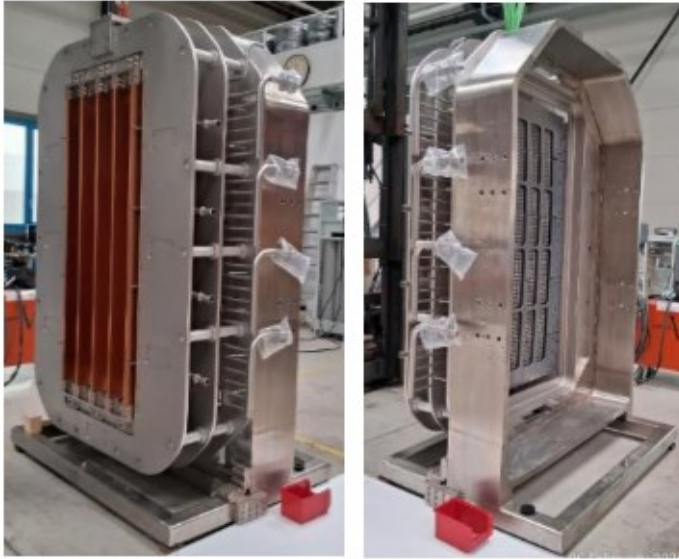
Assembly of 3 -grid accelerator (with dummy insulators).
